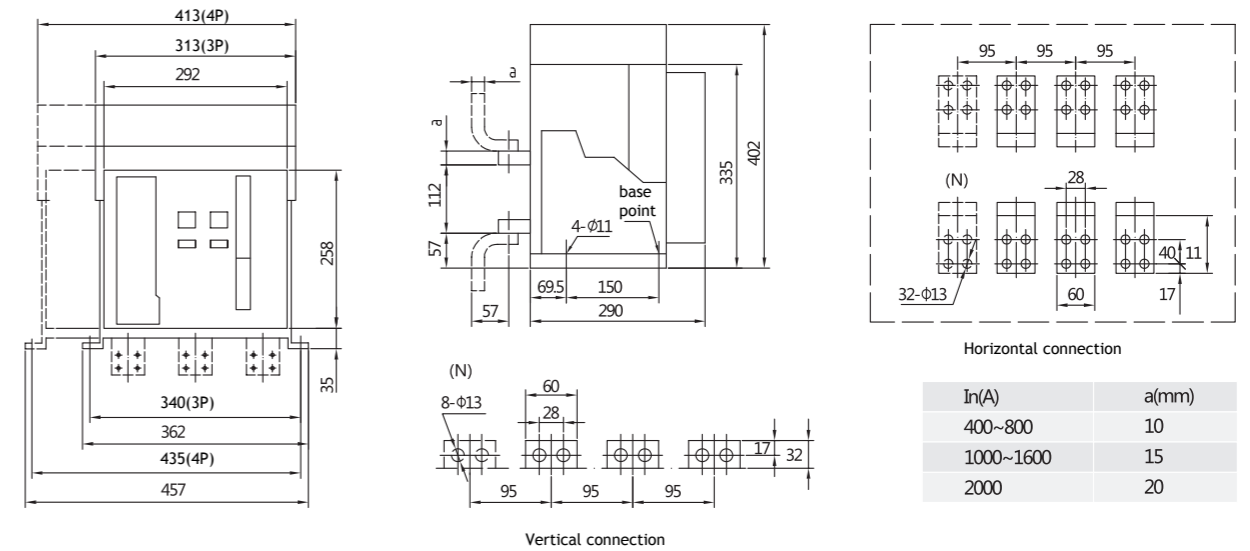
RDSW6-3200/3, 3200/4 Fixed type install and shape dimension
